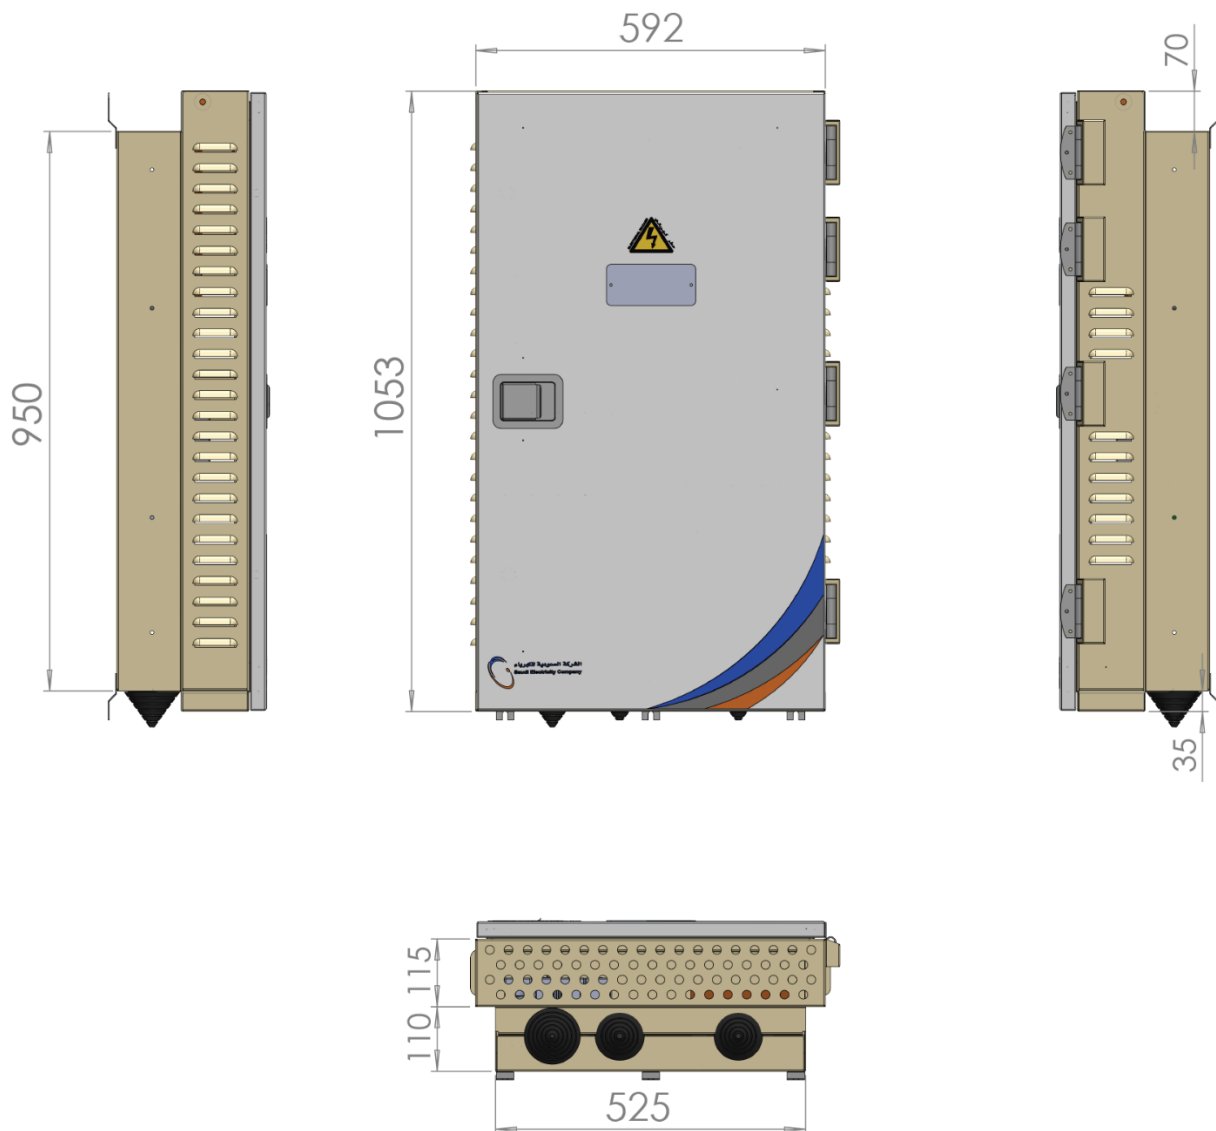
Perspective Drawing of a 200/250A CT-Meterbox with Steel Enclosure
